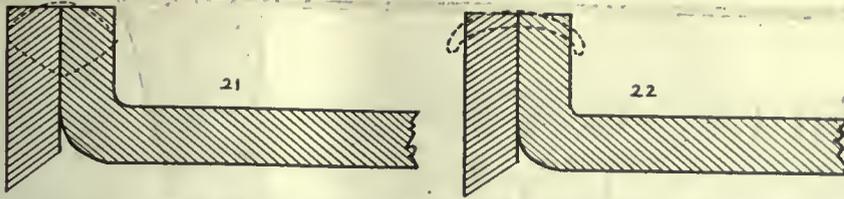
LIGHT PRESSURE CYLINDER HEAD PROPERLY WELDED. FIG. 22—ORDINARY WELD OF SAME HEAD.
